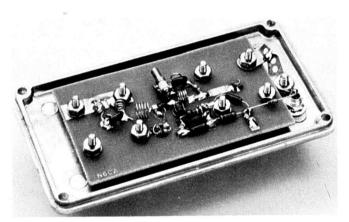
The 70-cm GaAsFET preamplifier is built on a PC board that is mounted to the lid of a diecast box. This version uses a Zener diode instead of the 3-terminal regulator shown in Figs 2 and 3. Connector mounting hardware also holds the board in place. Component layout is shown in Fig 3.
